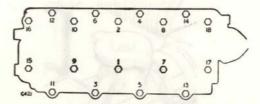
Order of tightening cylinder head bolts $\frac{1}{2}$ in. bolts to 65 lb./ft. (8,9 kg/m) $\frac{1}{6}$ in. bolts to 18 lb./ft. (2,4 kg/m)
